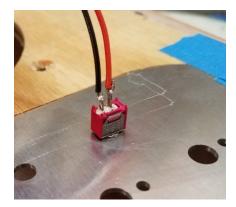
Presence switch wiring. Don't worry about feeding the wire through the tiny terminals on this switch prior to soldering. Laying the bare part of the wire flat against the terminal and soldering it is fine.
